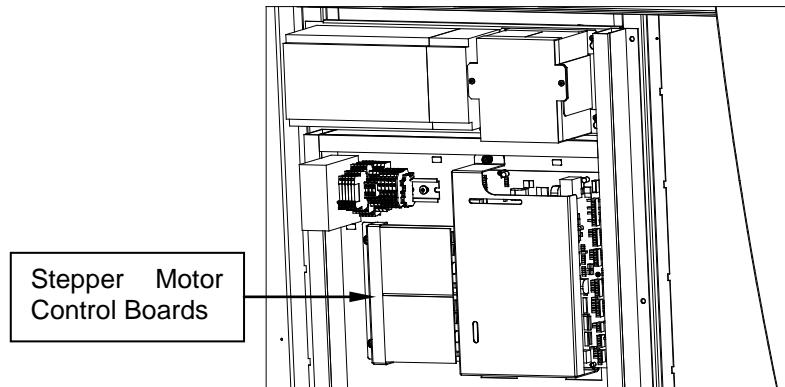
T1 STEPPER MOTOR CONTROL BOARDS
